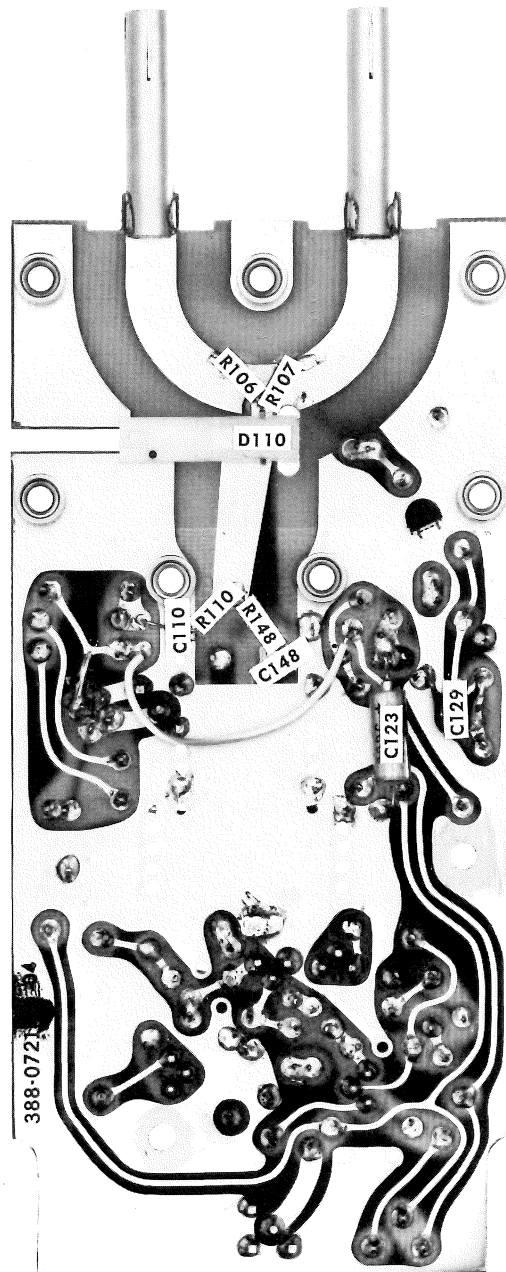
B. Sampler circuit board assembly (back) for SN 3000 and up.
